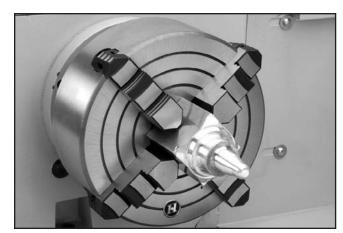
Generic picture of non-cylindrical workpiece correctly mounted on the 4-jaw chuck.
